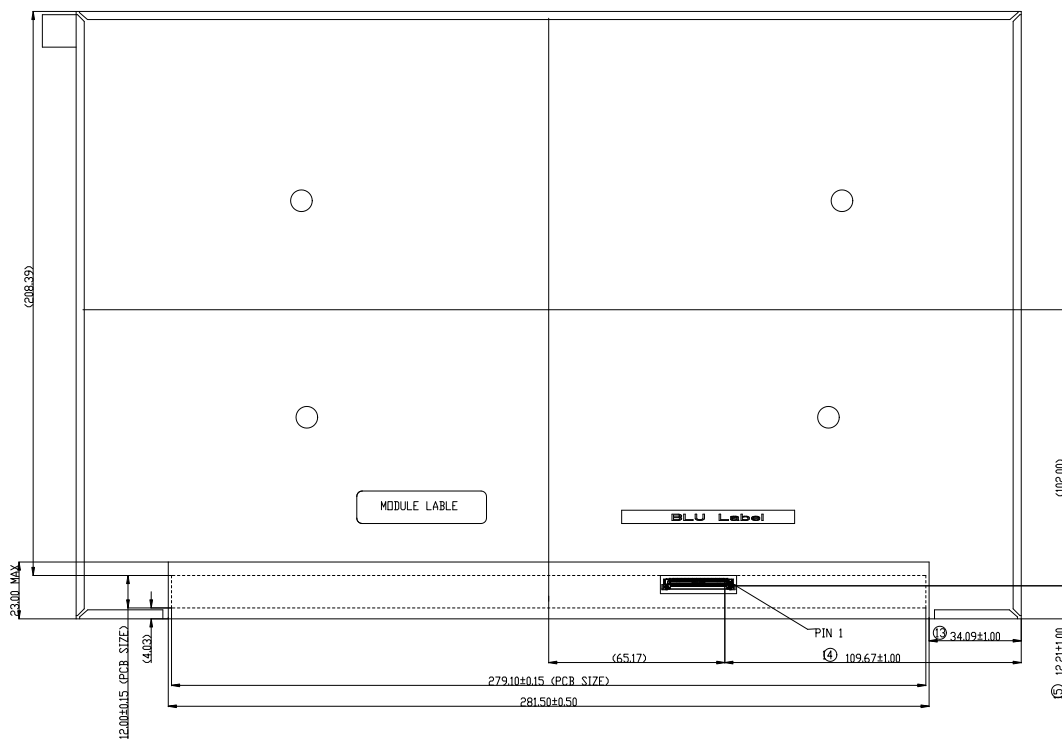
TFT-LCD Module Outline Dimensions (Rear view)
